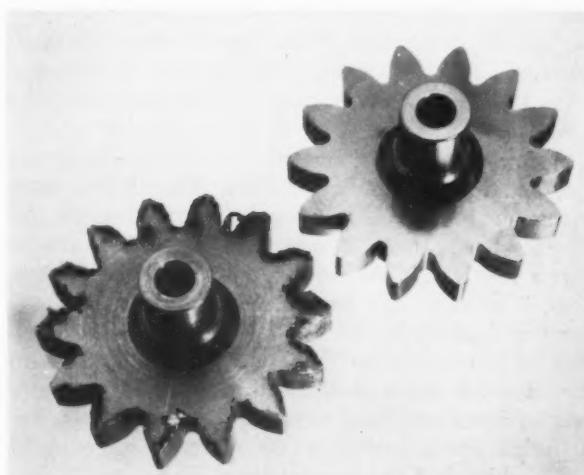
Hardened gear tumbled to remove scale and to form 0.015" radius.
